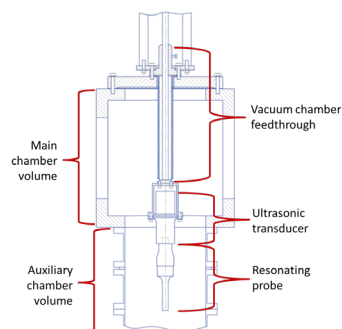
Schematic front view of the ultrasonic probe inside the CUBEvac chamber.
